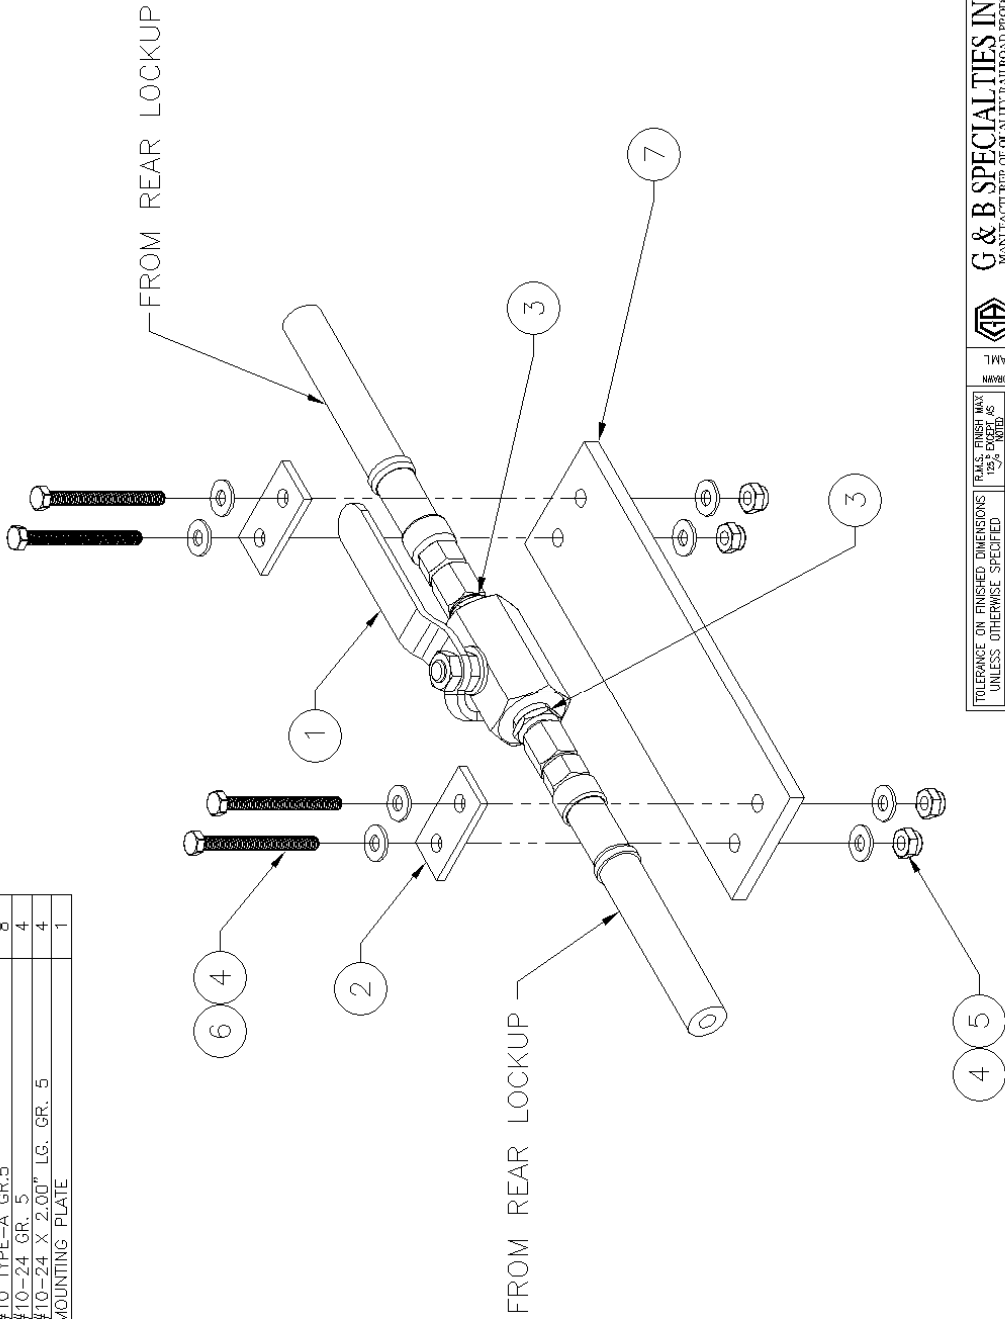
Rear Railgear Hydraulic Axle Lockup (ref: Table 2A)
